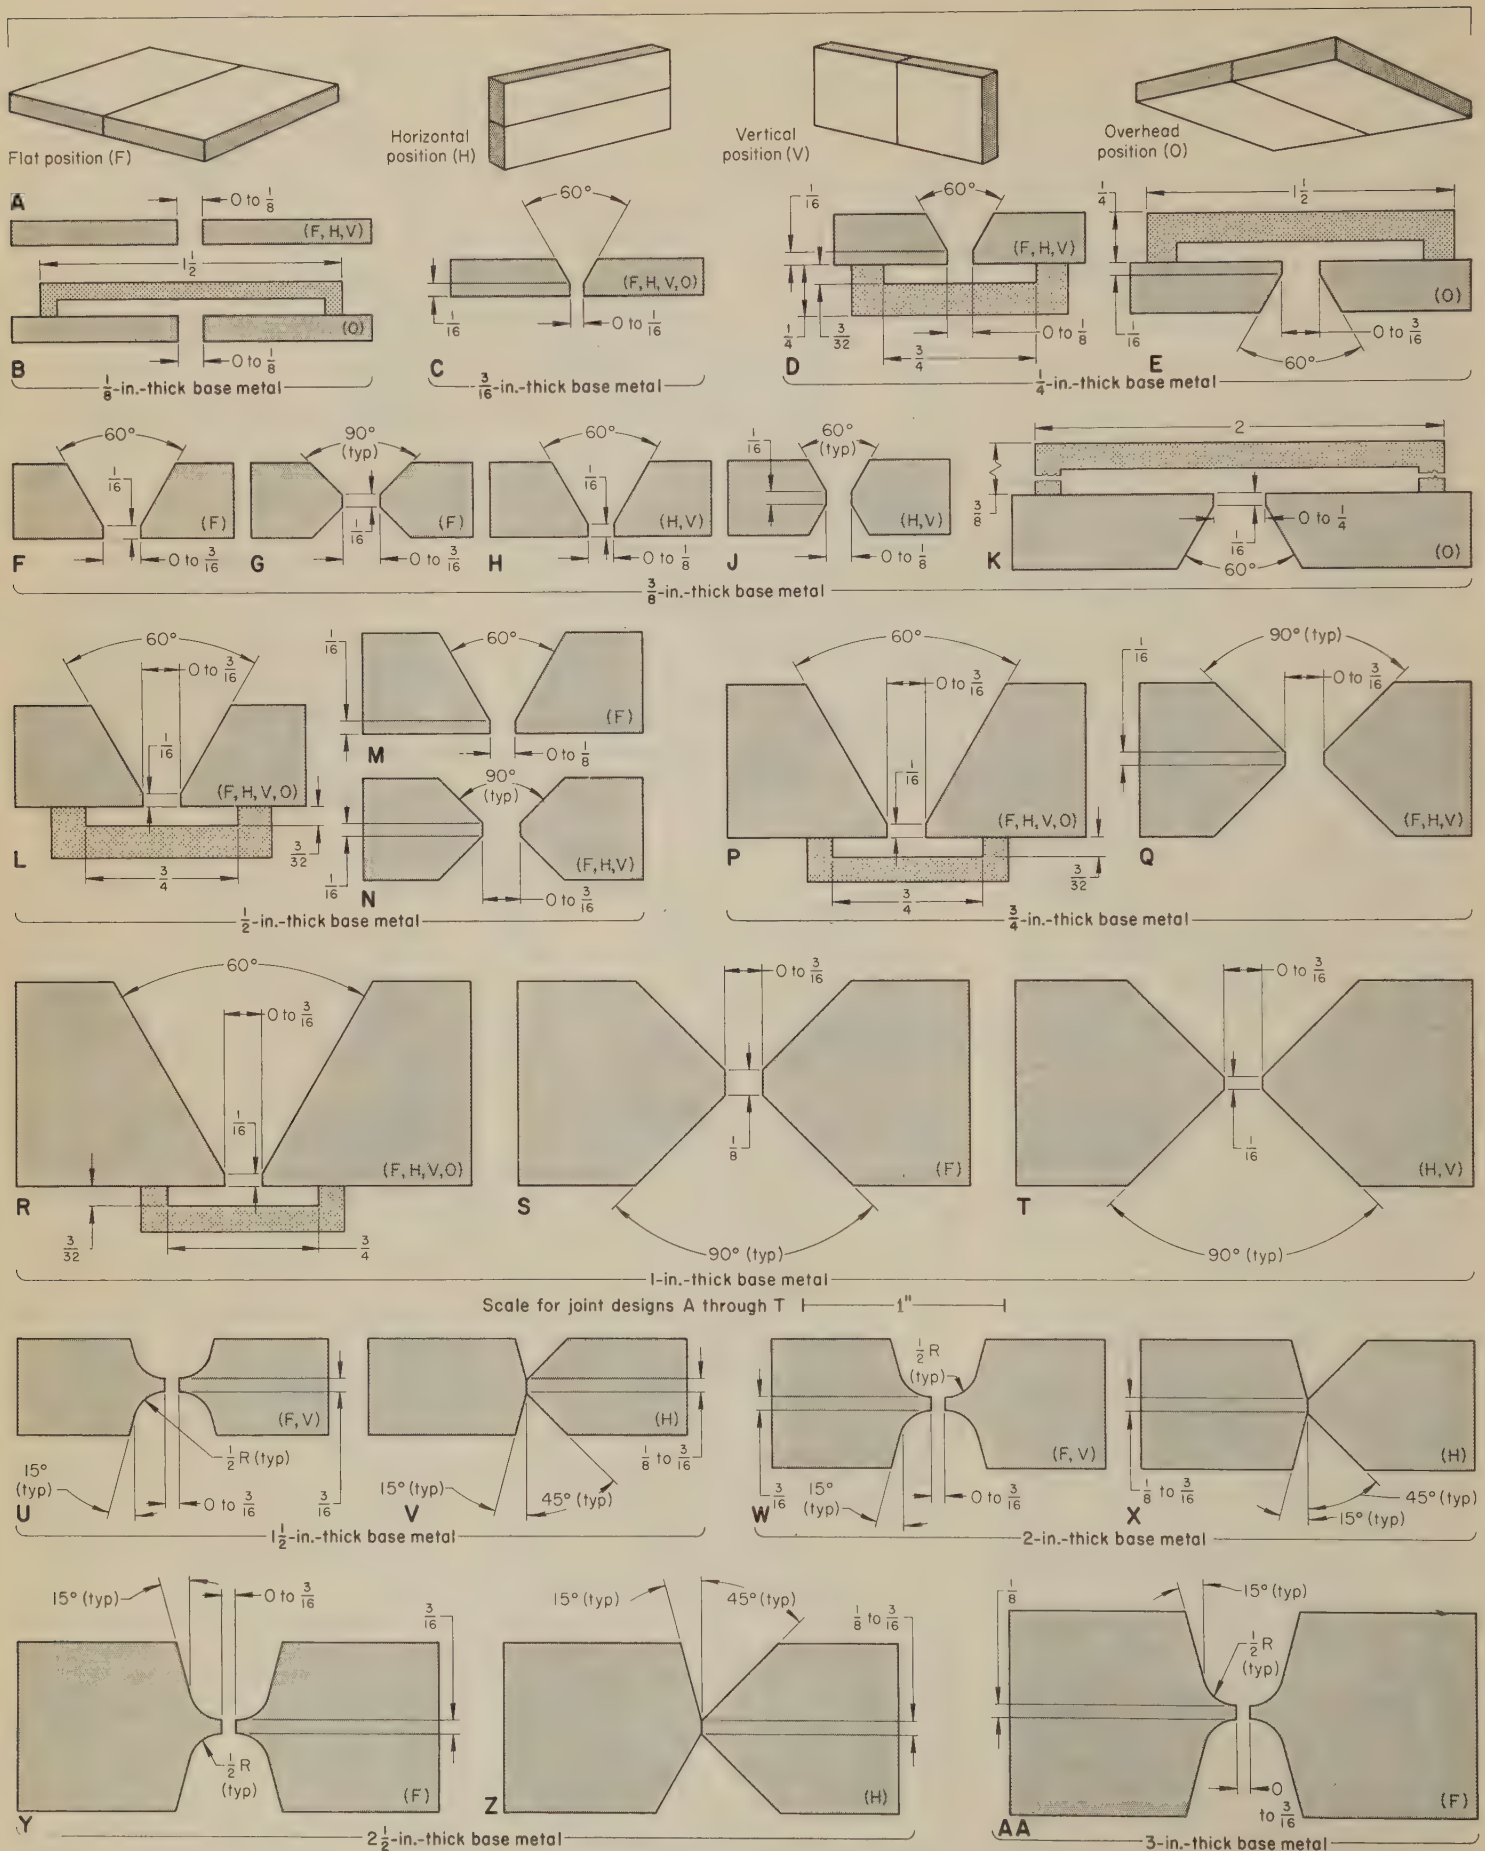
Butt-joint designs for which applicable welding conditions are given in Table 10
